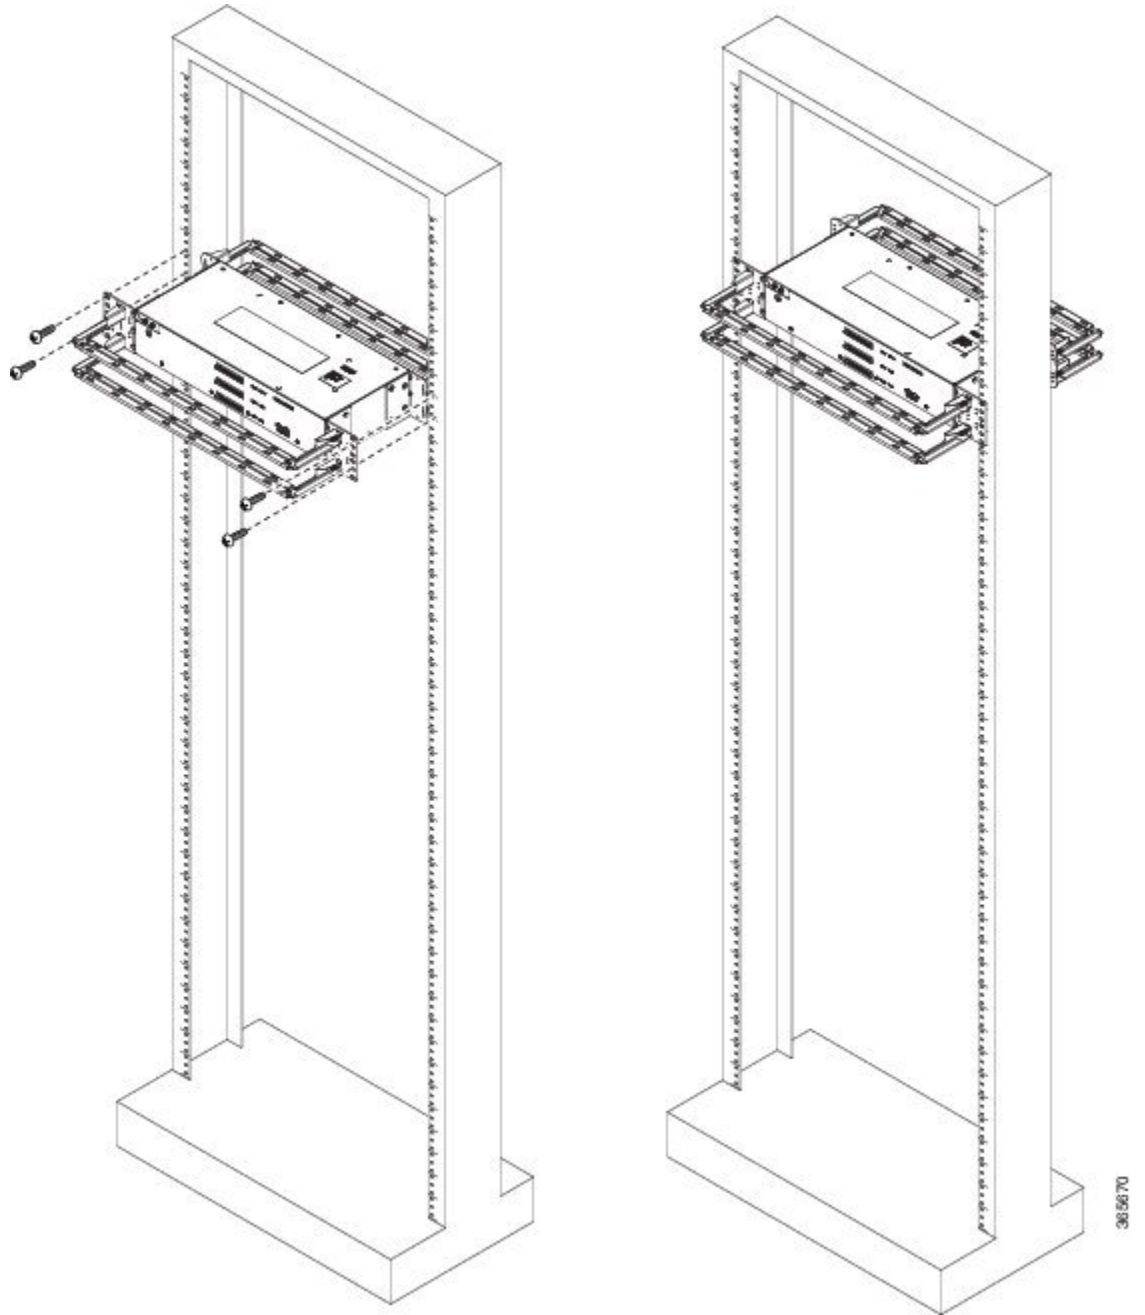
Patch Panel Rear View with Brackets and Guides Installed on Rack
